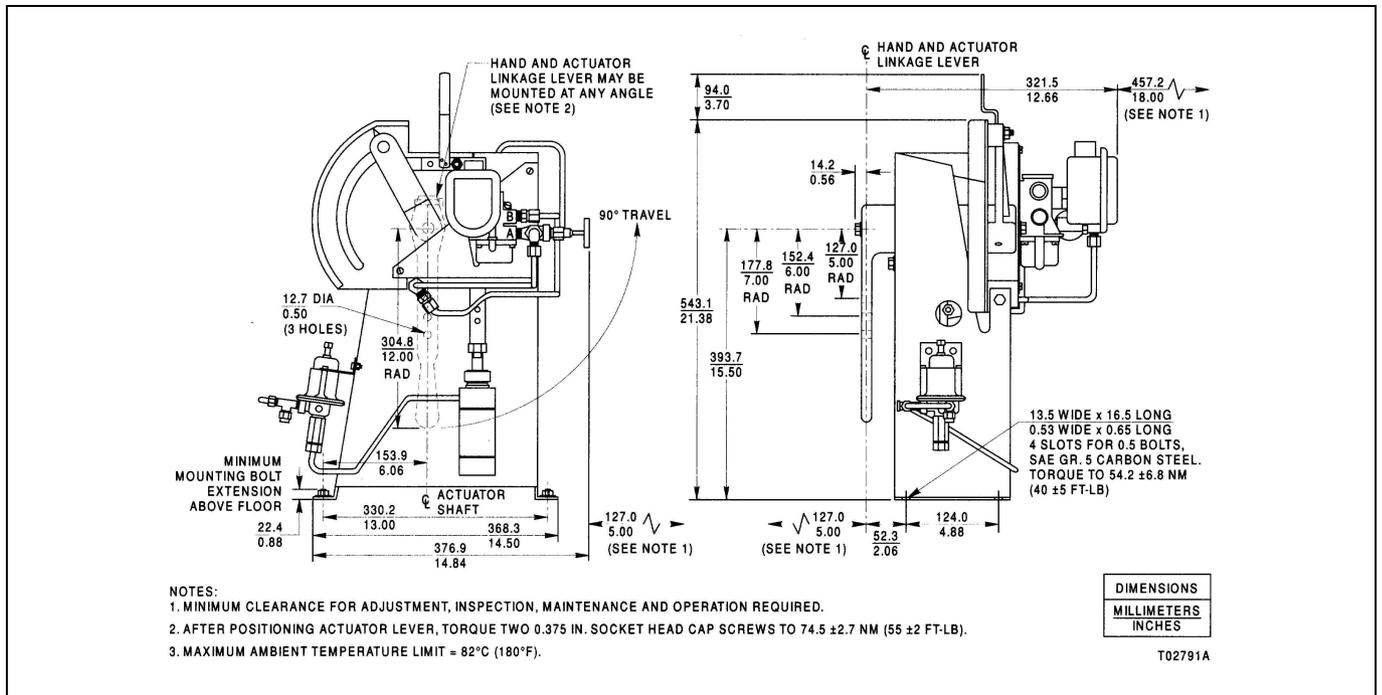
Type UP1 Actuator with Solenoid Valve and Air Failure Lock
